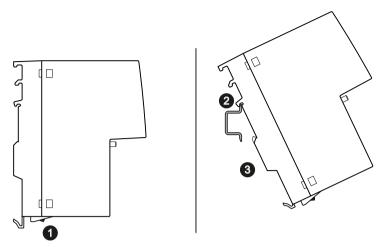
DIN rail mounting with securing bar in the wall mounting position.
